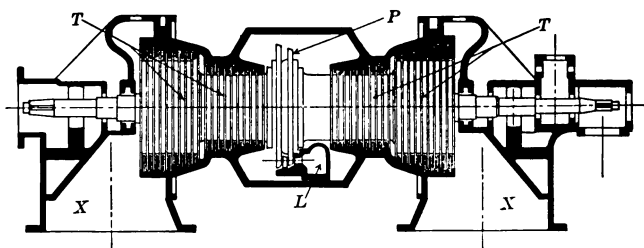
WESTINGHOUSE DOUBLE-FLOW TURBINE, ROTOR AND CASING
